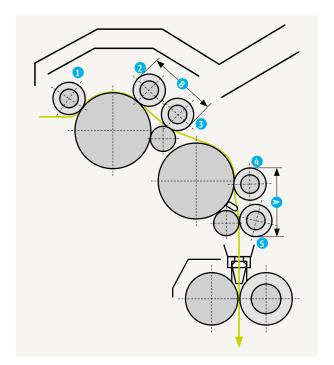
5-over-4 roller drafting arrangement (formerly Rieter)
